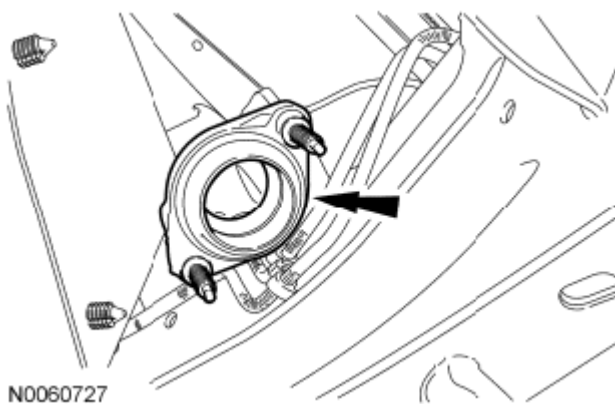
Locating LH Exhaust Manifold And Gaskets
